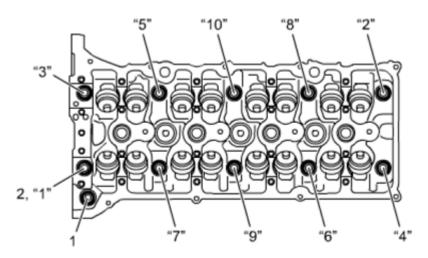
Identifying Cylinder Head Bolts Courtesy of SUZUKI OF AMERICA CORP.
